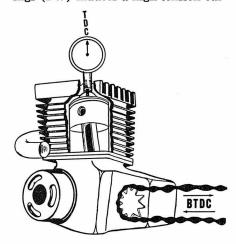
On some engines, it will be necessary to measure piston travel with rule, dial indicator or special timing gage when adjusting or checking ignition timing. Arrows show direction to move chain to position piston Before Top Dead Center after TDC has been located.
